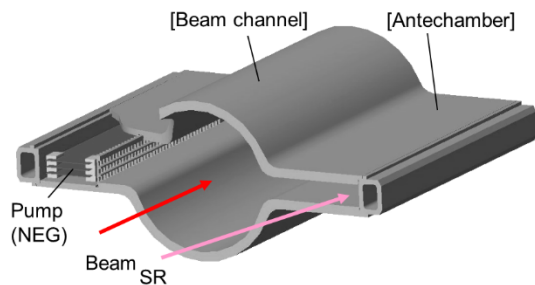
Typical cross section of a beam pipe at arc sections for LER.
